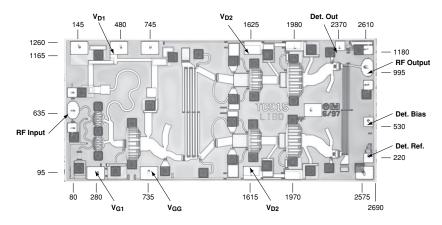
HMMC-5033 Bonding Pad Locations. (Dimensions are in micrometers)
